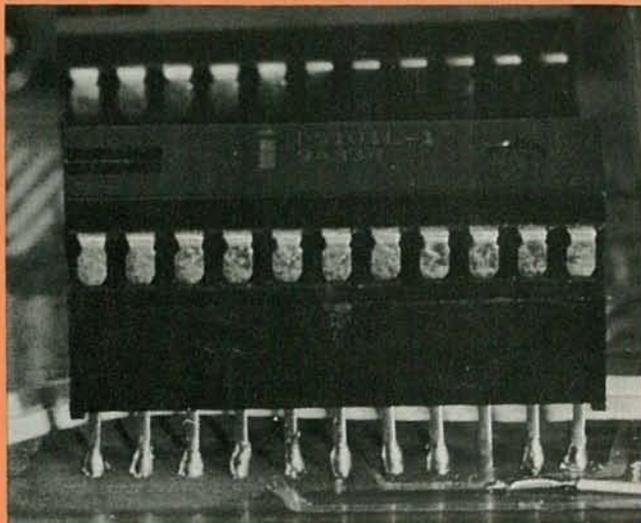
SINCE THE HOLES ARE NOT PLATED THROUGH, wire-wrap sockets should be raised about 3/16 inch off the board so that the pins can be soldered on both sides.
